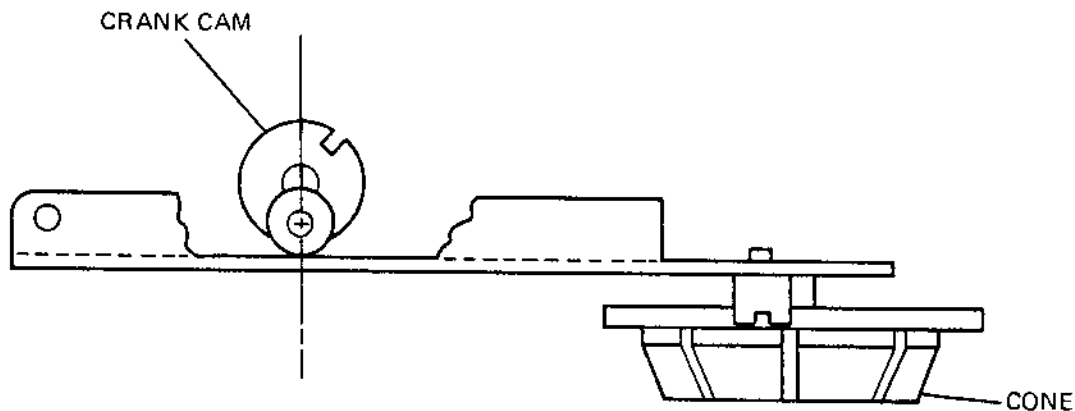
B. Eject Motor Cam Alignment Check - Carrier Closed
